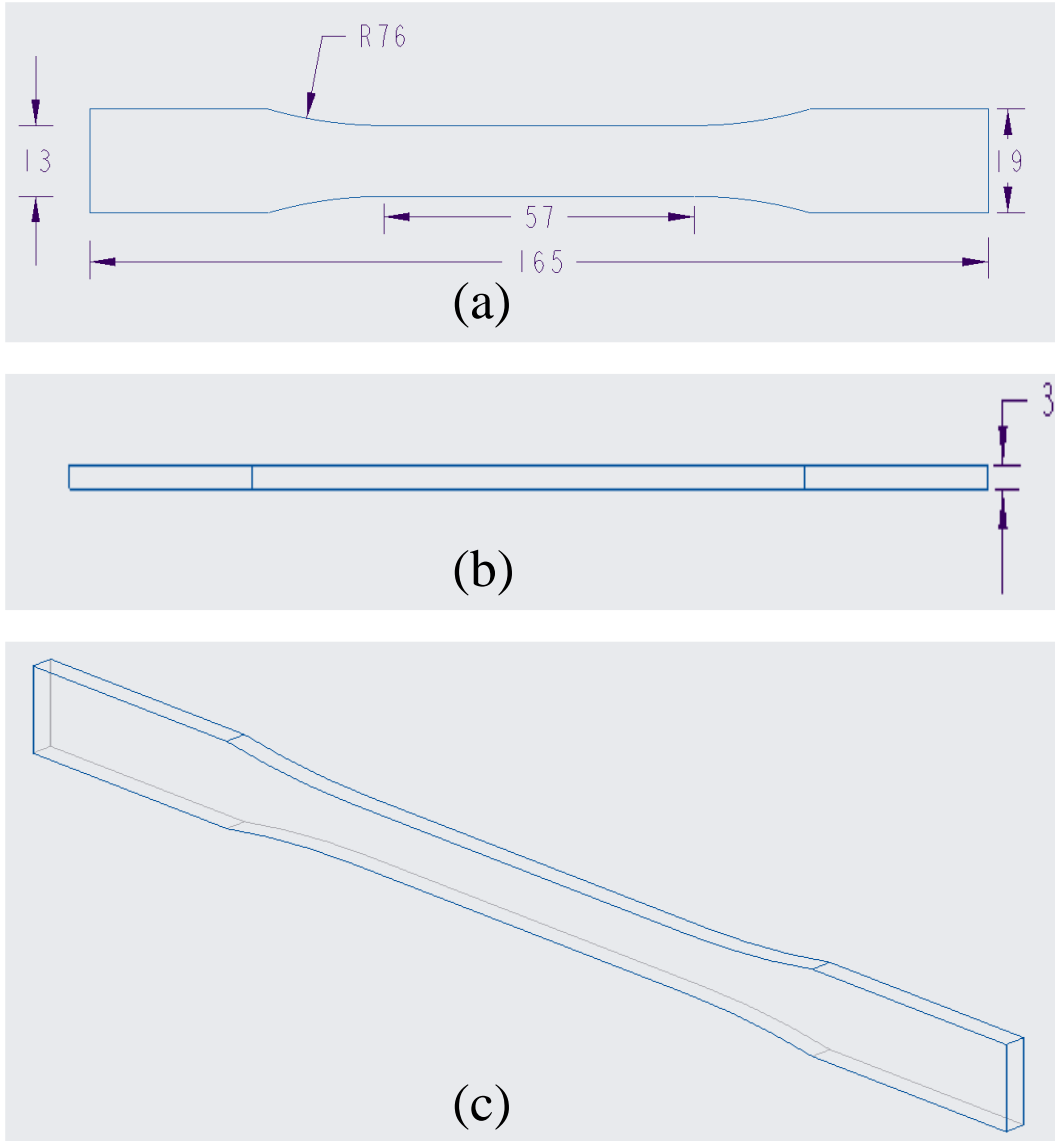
Dimensions of the specimen include (a) Top View, (b) Front View, and (c) 3D View.
